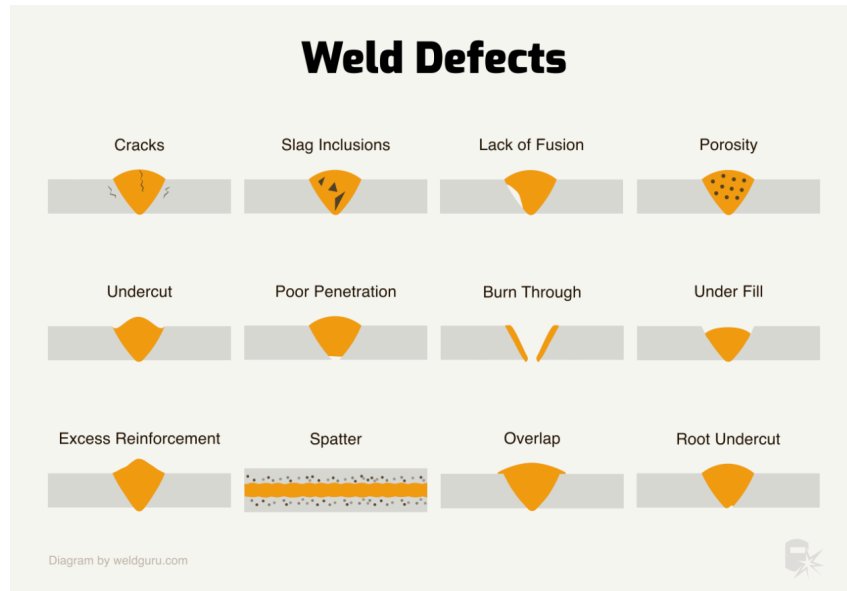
Common types of welding defects. *Image Credits:* <https://weldguru.com/common-welding-defects> [16].
